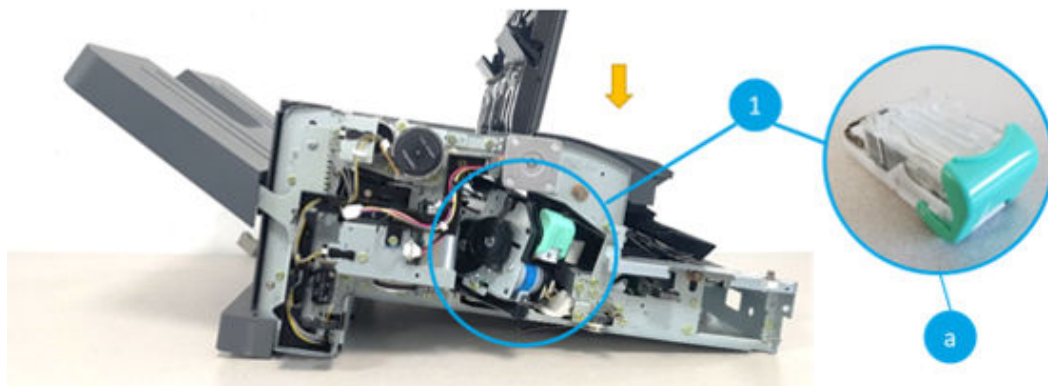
Inner finisher system - stapler unit detail view (2 of 2)
